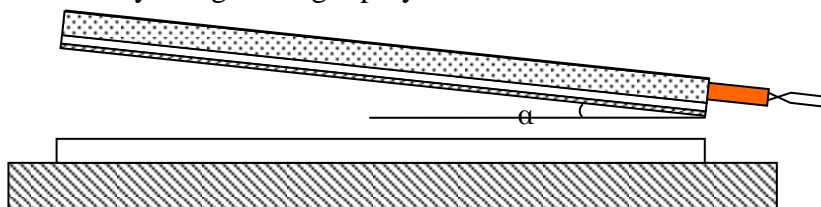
Experiment of explosive welding of lead foil with steel plate.
